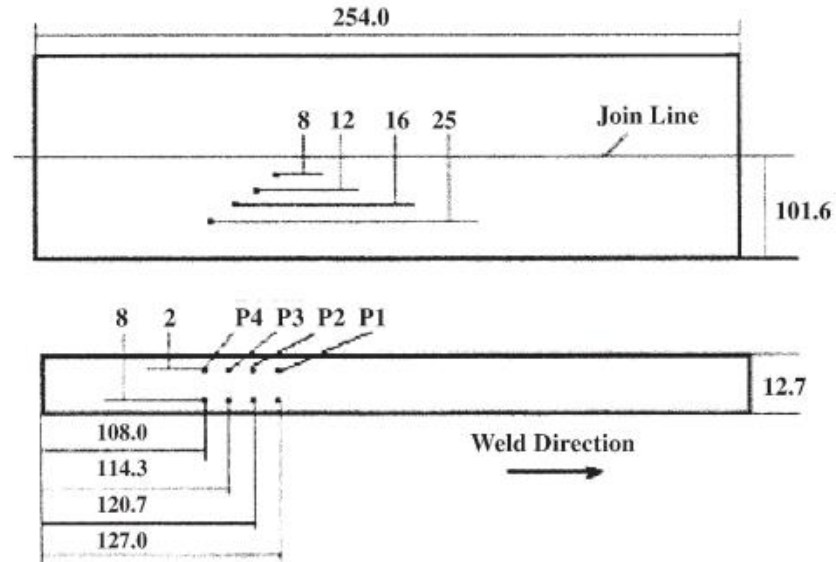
Location of thermocouples imbedded in the workpiece (butt joint) [Song]
